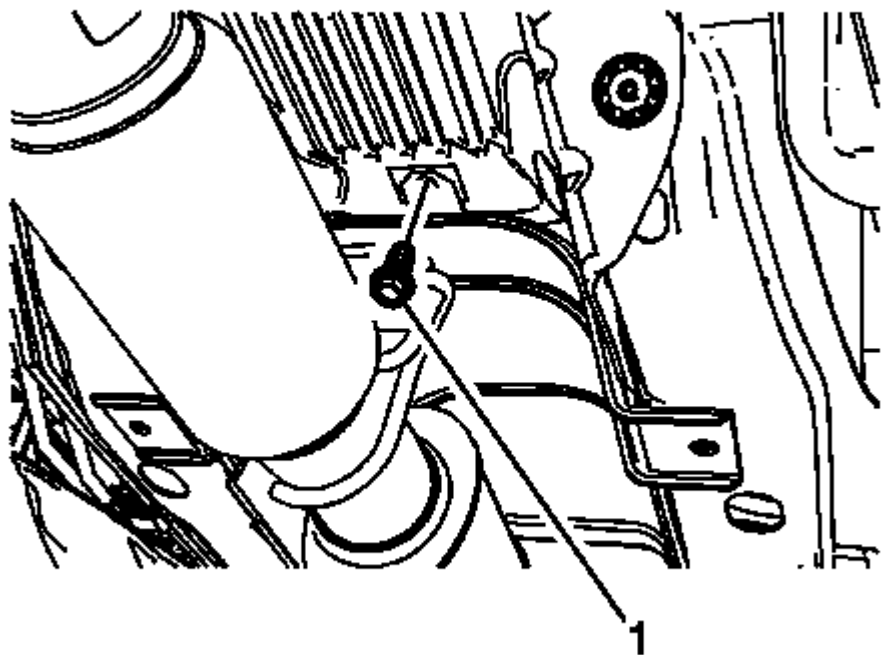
Exhaust Pipe Front Hanger Bracket Fastener
